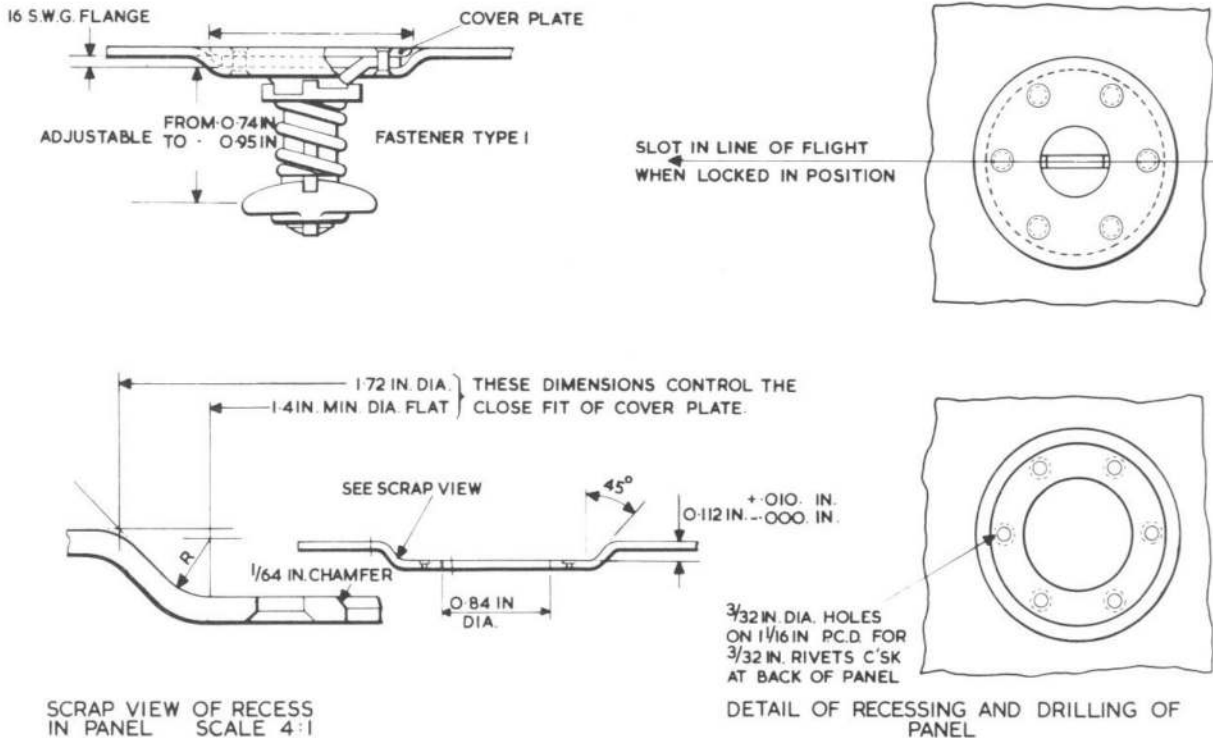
Mounting a fastener, Type 1, on the front of the cowling
